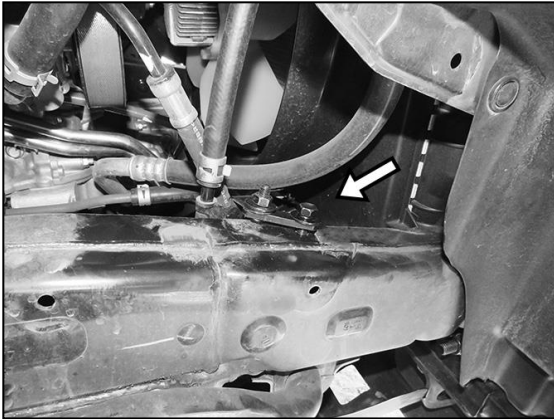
Remove factory hex bolt attaching bracket to top of frame (arrow-bolt not pictured)
